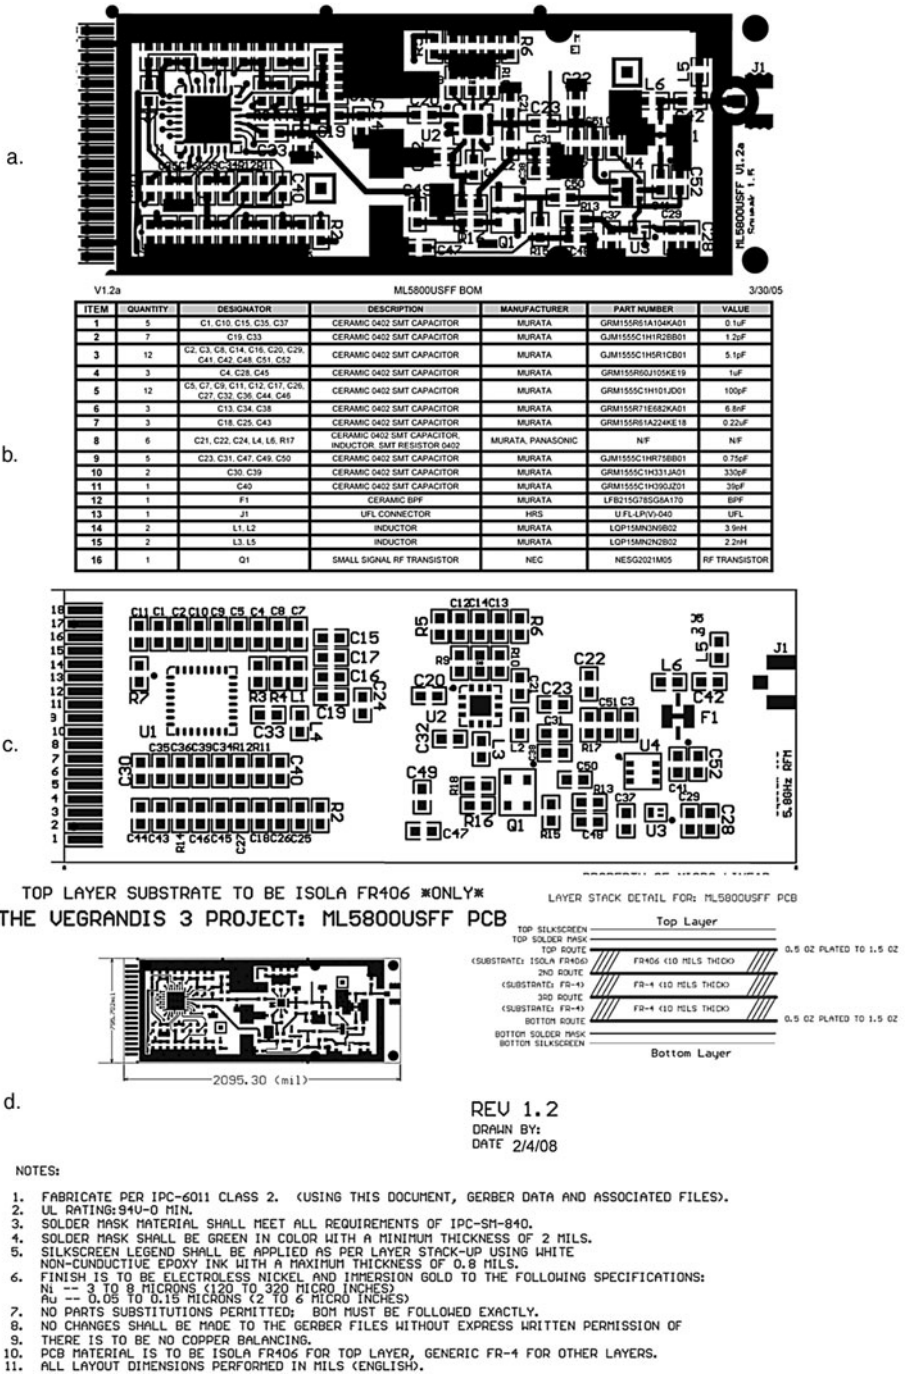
Production files as would be sent to a board house for PCB fabrication; (a) Gerbers; (b) BOM; (c) assembly drawing; (d) fabrication drawing.
